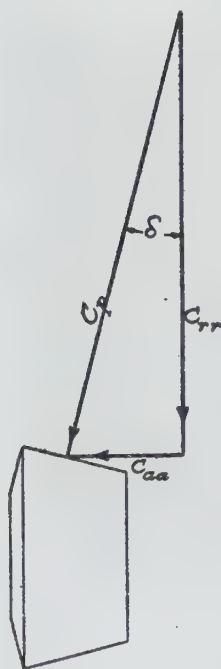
COMPONENT PERPENDICULAR TO PITCH CONE ELEMENT RESOLVED INTO AXIAL AND RADIAL COMPONENTS.
